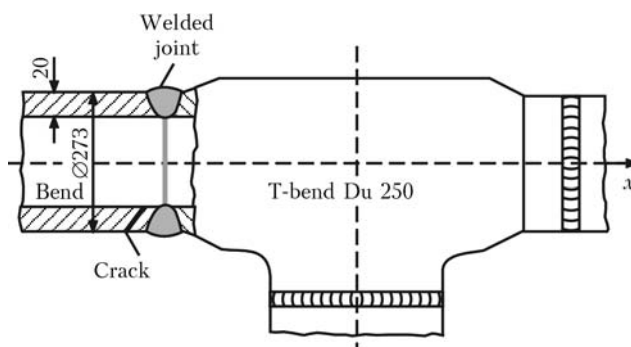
Scheme of a crack in welded joint with T-bend
